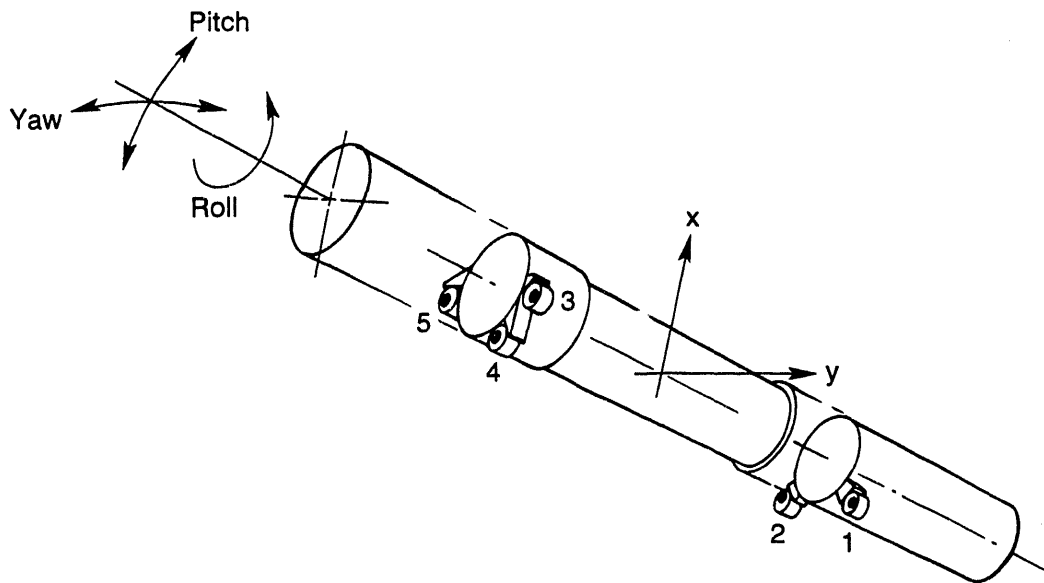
View of the support barrel, showing its five remotely adjusted roller cams.
